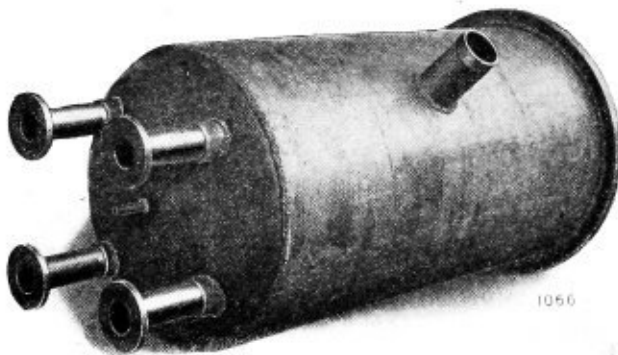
Large Tank with All Seams Welded with Metallic Electrode
